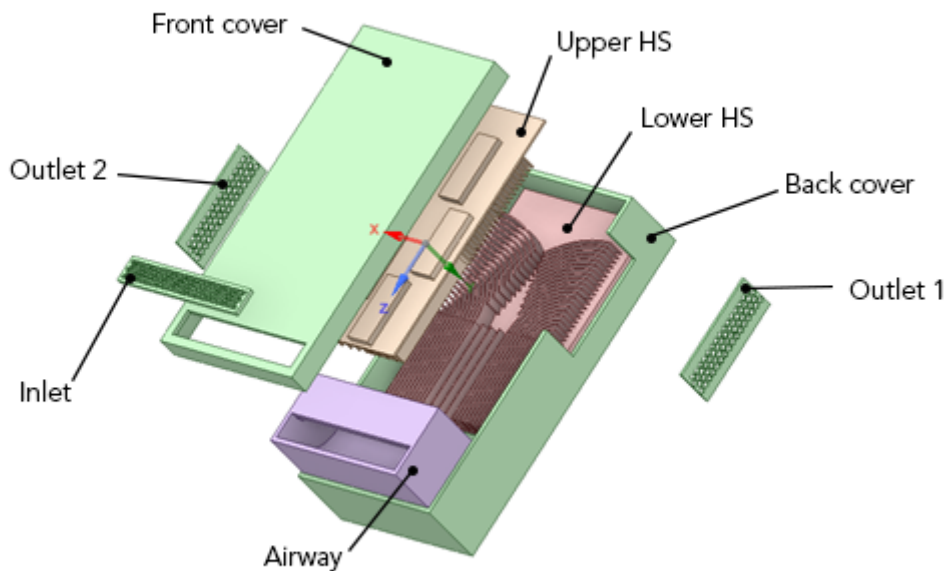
Exploded view of the CFD model showing the various listed parts.
